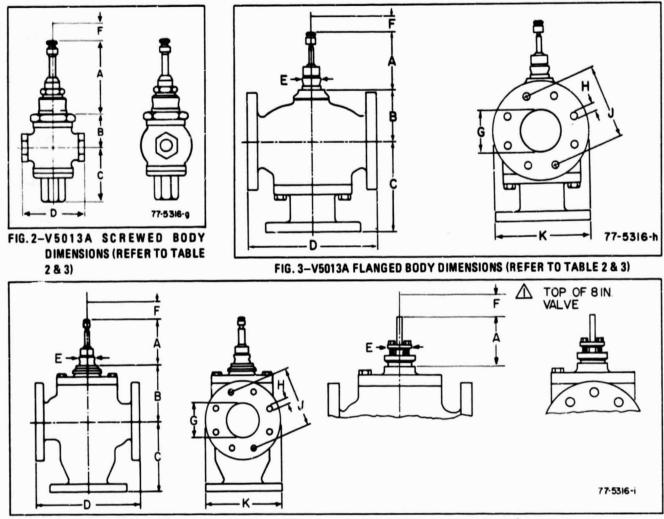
V5013B-E FLANGED BODY DIMENSIONS (REFER TO TABLE 2 & 3)
